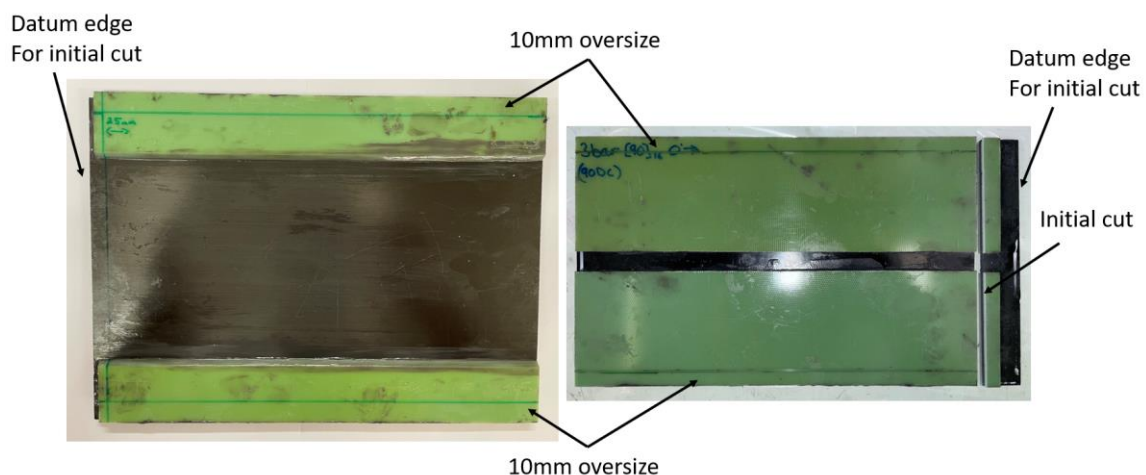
Layout lines and datum edge to prepare laminate for specimens to be cut out.
